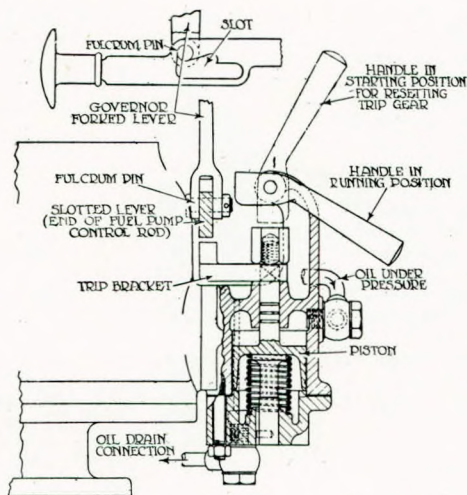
The Mirrlees safeguard for lubricating oil pressure.
